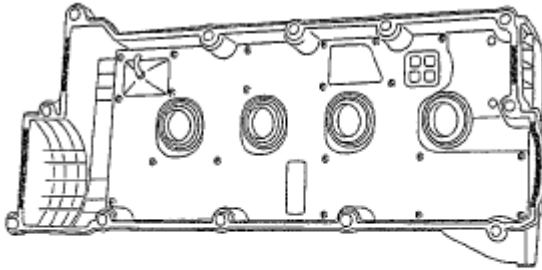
Identifying Cylinder Head Cover Gasket And Cylinder Head Cover
